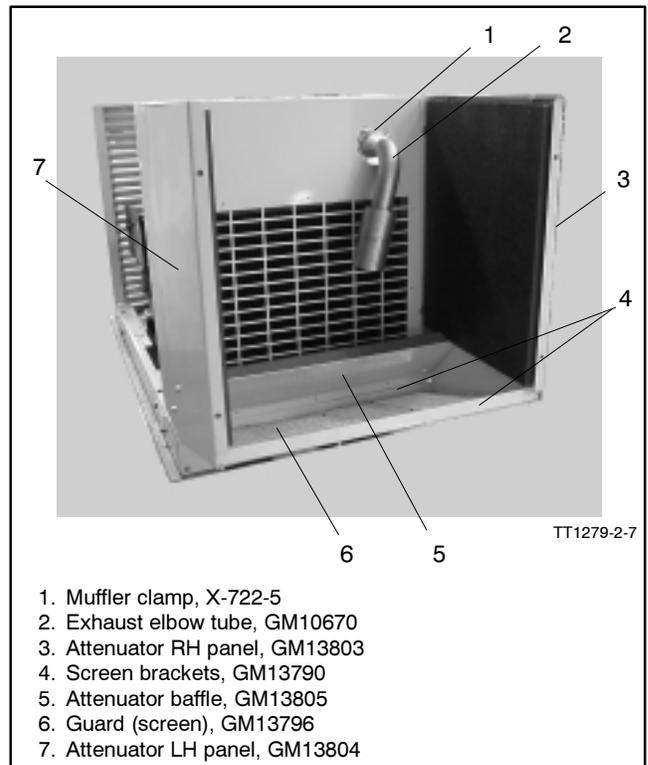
Exhaust End Attenuator Assembly (roof and front panel removed)
